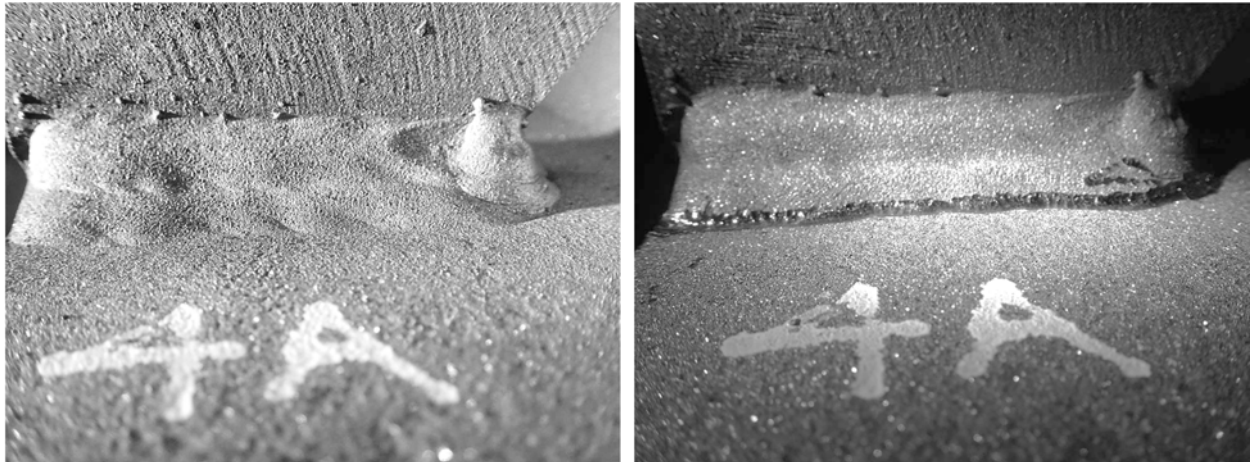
, Figure 3.8b: Transverse Stiffener Fillet Weld Toe Before and After UIT
